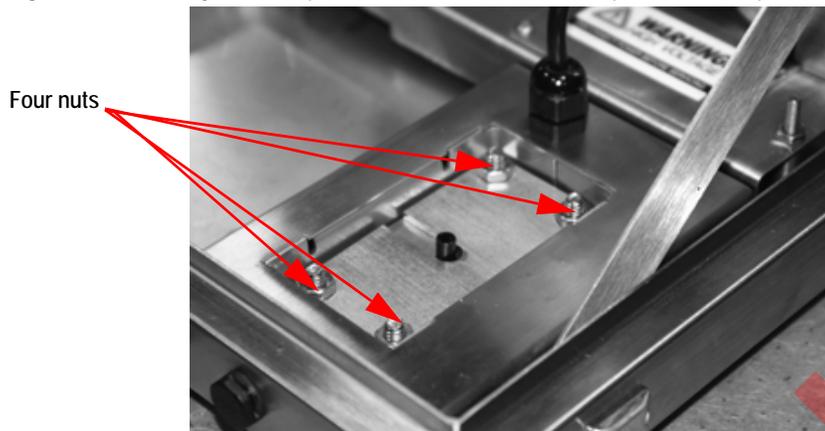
Split Communications Cable Assembly in the SST3 Printer Enclosure
